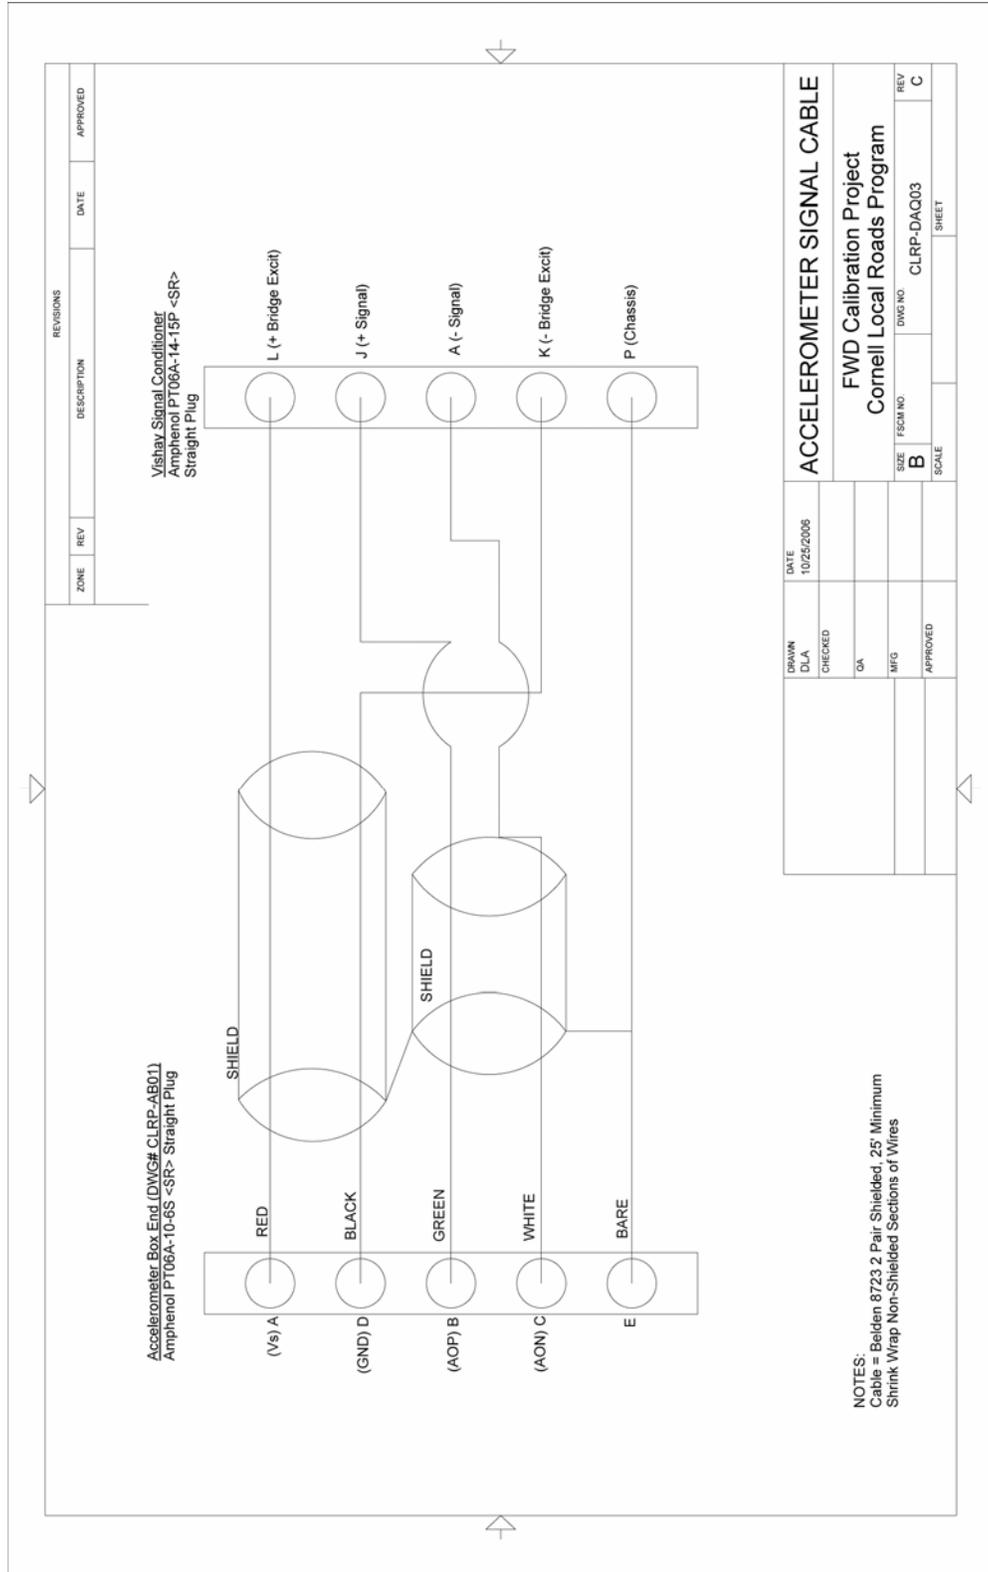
Drawing. CLRP-DAQ03 Accelerometer Signal Cable.
